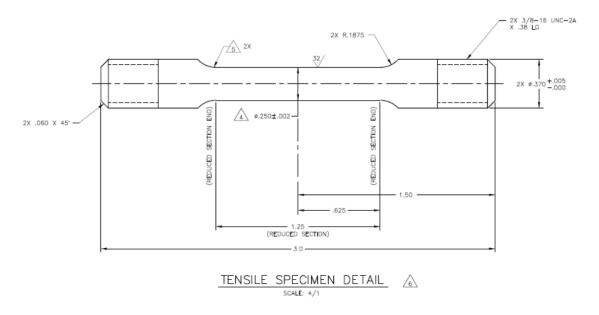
Example of ASTM Standard size round tensile specimen used in creep testing of Alloy 617 at INL.
